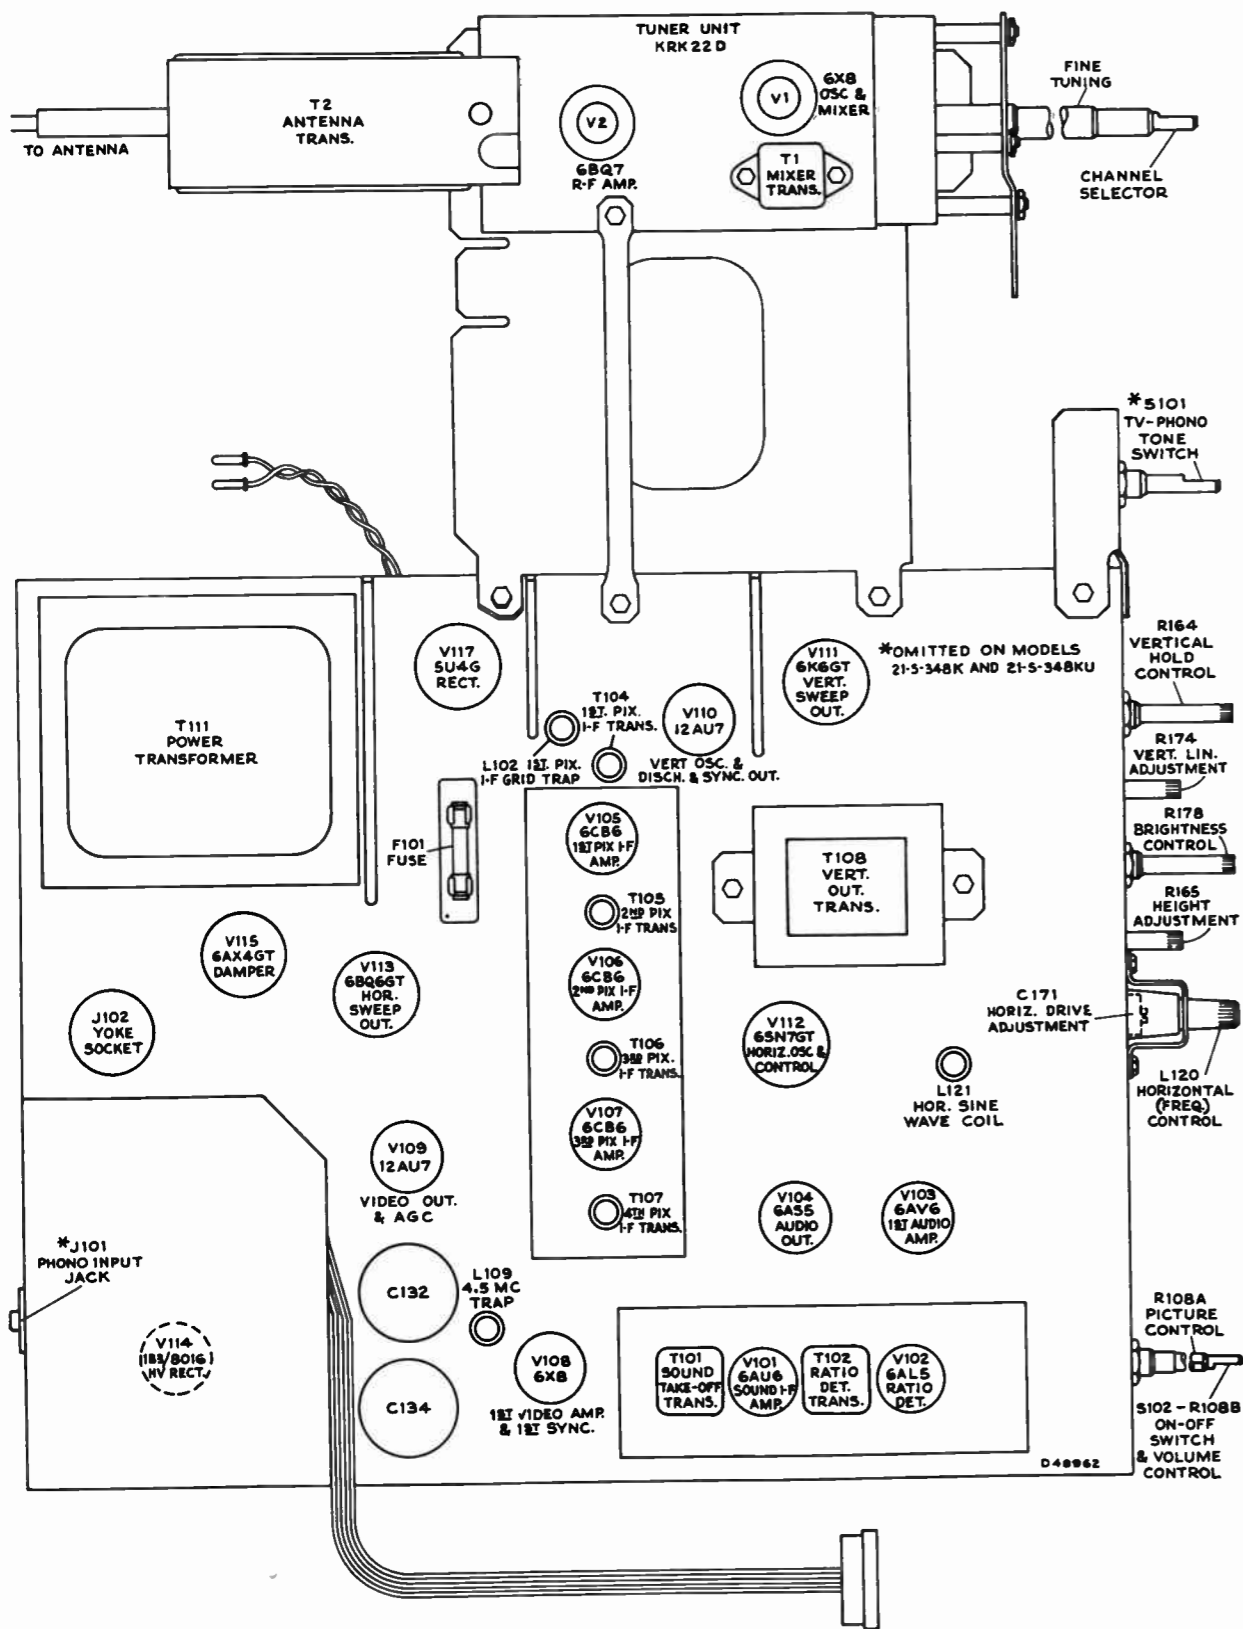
Chassis Top View (shown with KRK22D Tuner)
